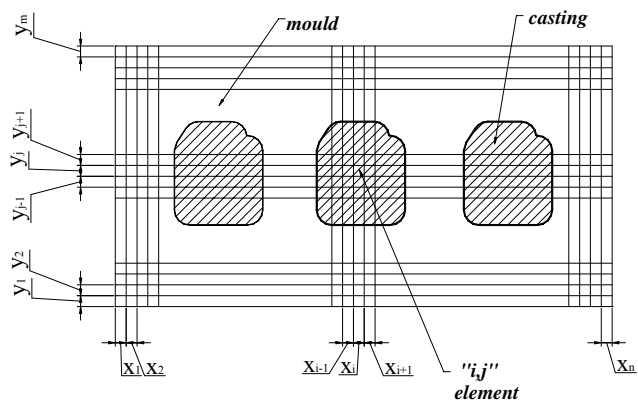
Cross section through mould-part assembly and the sharing in elementary surfaces.
